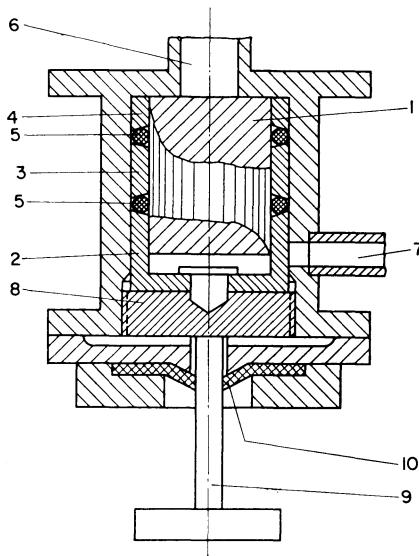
Variable leak consisting of O-rings compressed between metal rings. After Amoignon²⁹ (*Courtesy of Société Française des Ingénieurs et Techniciens du Vide*)
